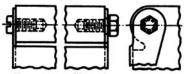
Sheet-iron cover with hinge ears fastened with shouldered hex head stud or fillister head screws.
